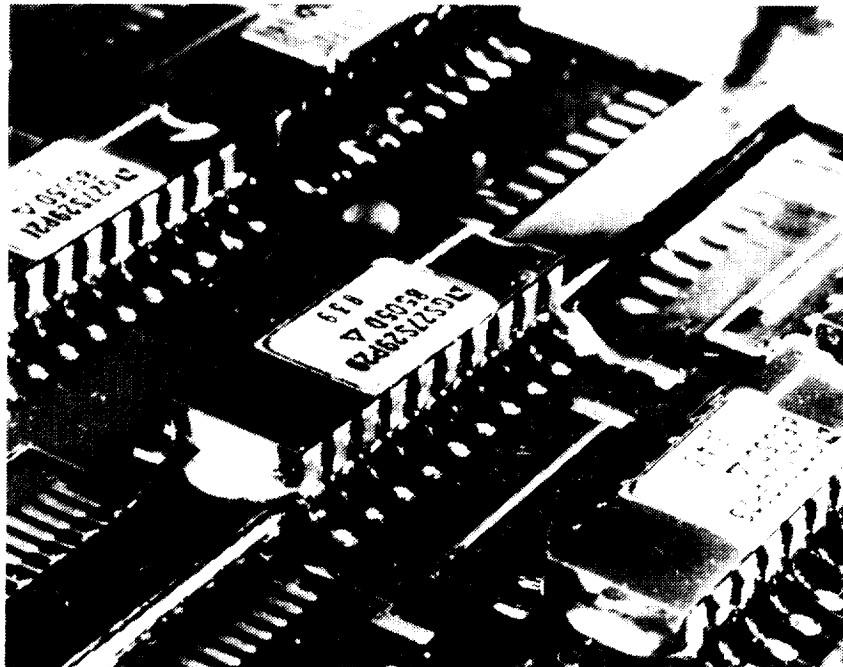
DIPs mounted over 0.060" copper heat sinks
